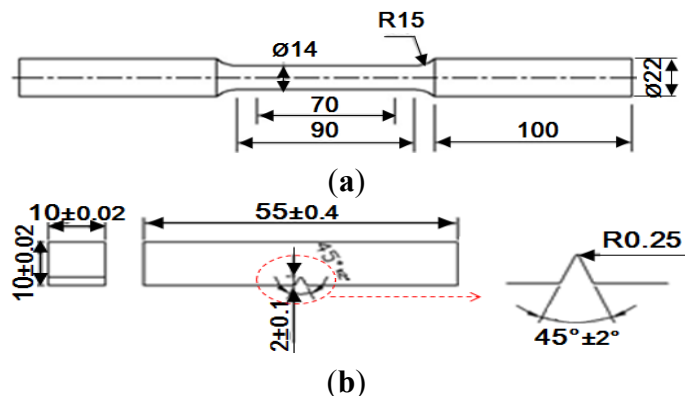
The dimension of tensile test specimen and impact test specimen. (a) tensile test specimen; (b) impact test specimen.
